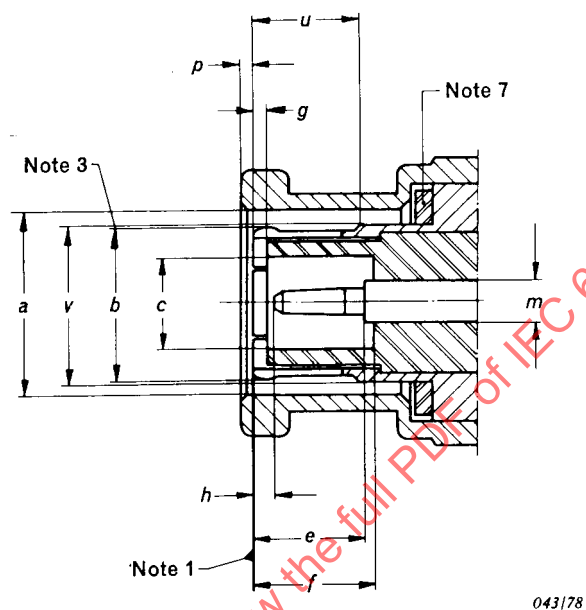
Connector with pin-centre contact (for dimensions, see Table 1)
